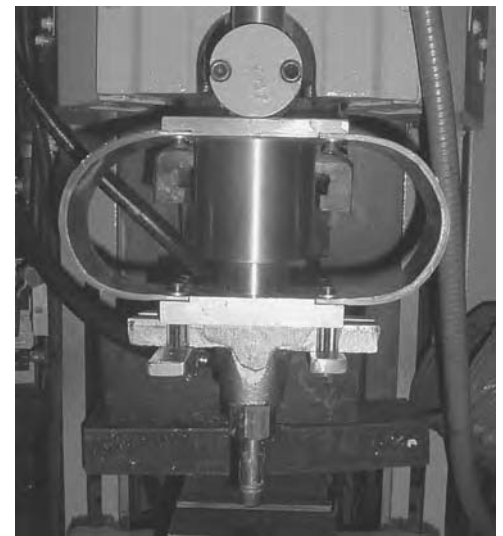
Typical fast followup head for resistance welding. The spring is located in the body of the assembly. Note the shunts providing a current flow path around the spring. Courtesy of Edison Welding Institute
